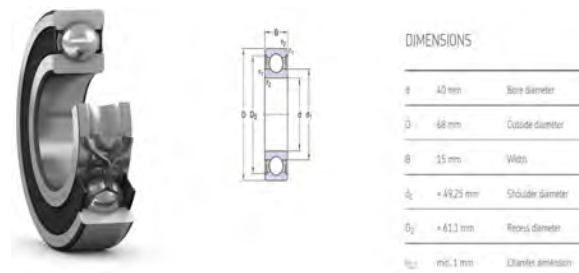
Radial 6008 2RSR ball bearing and dimensions used in tests [11]
